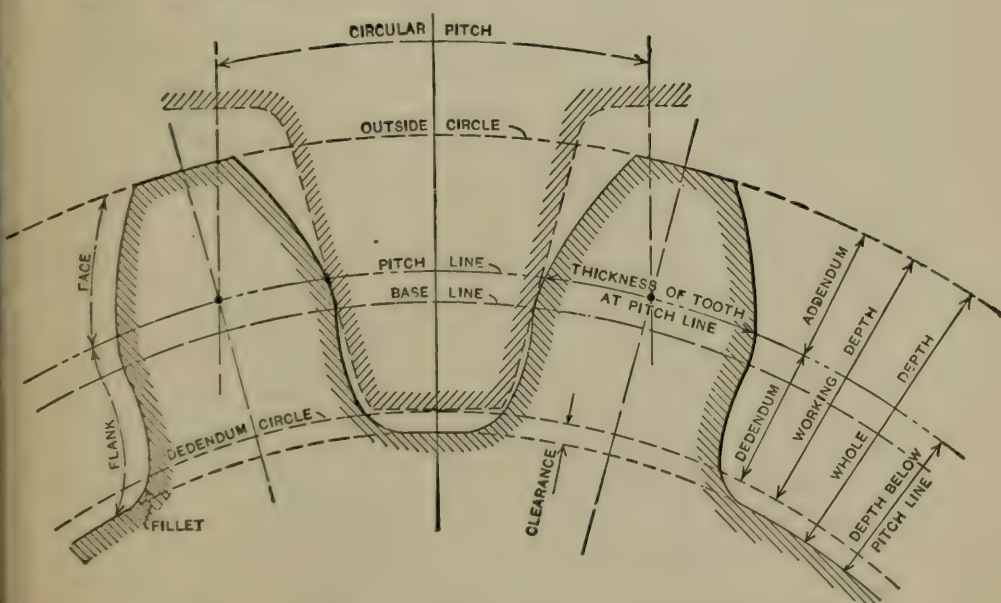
Diagram showing Dimensions and Definitions relating to Spur Gear Teeth.
